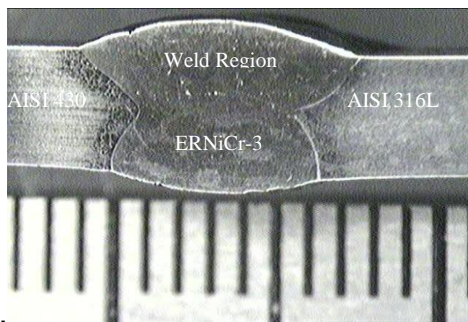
Macrostructure of the GTA weldments of dissimilar weldments employing ERNiCr-3
